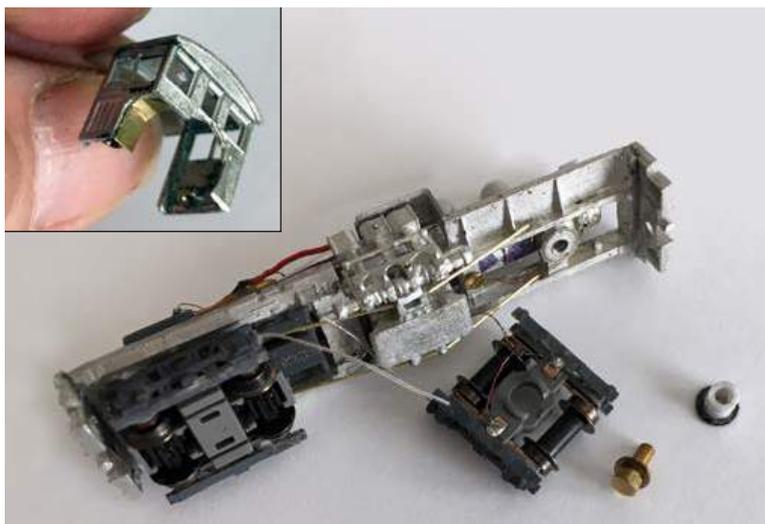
The cab sides and front were soldered together then 00-90 nuts soldered onto the inside of the side walls; the roof was glued in place with CA adhesive. Also note the mounting holes in the bottom of the water tank: two holes on diagonal corners were used.
